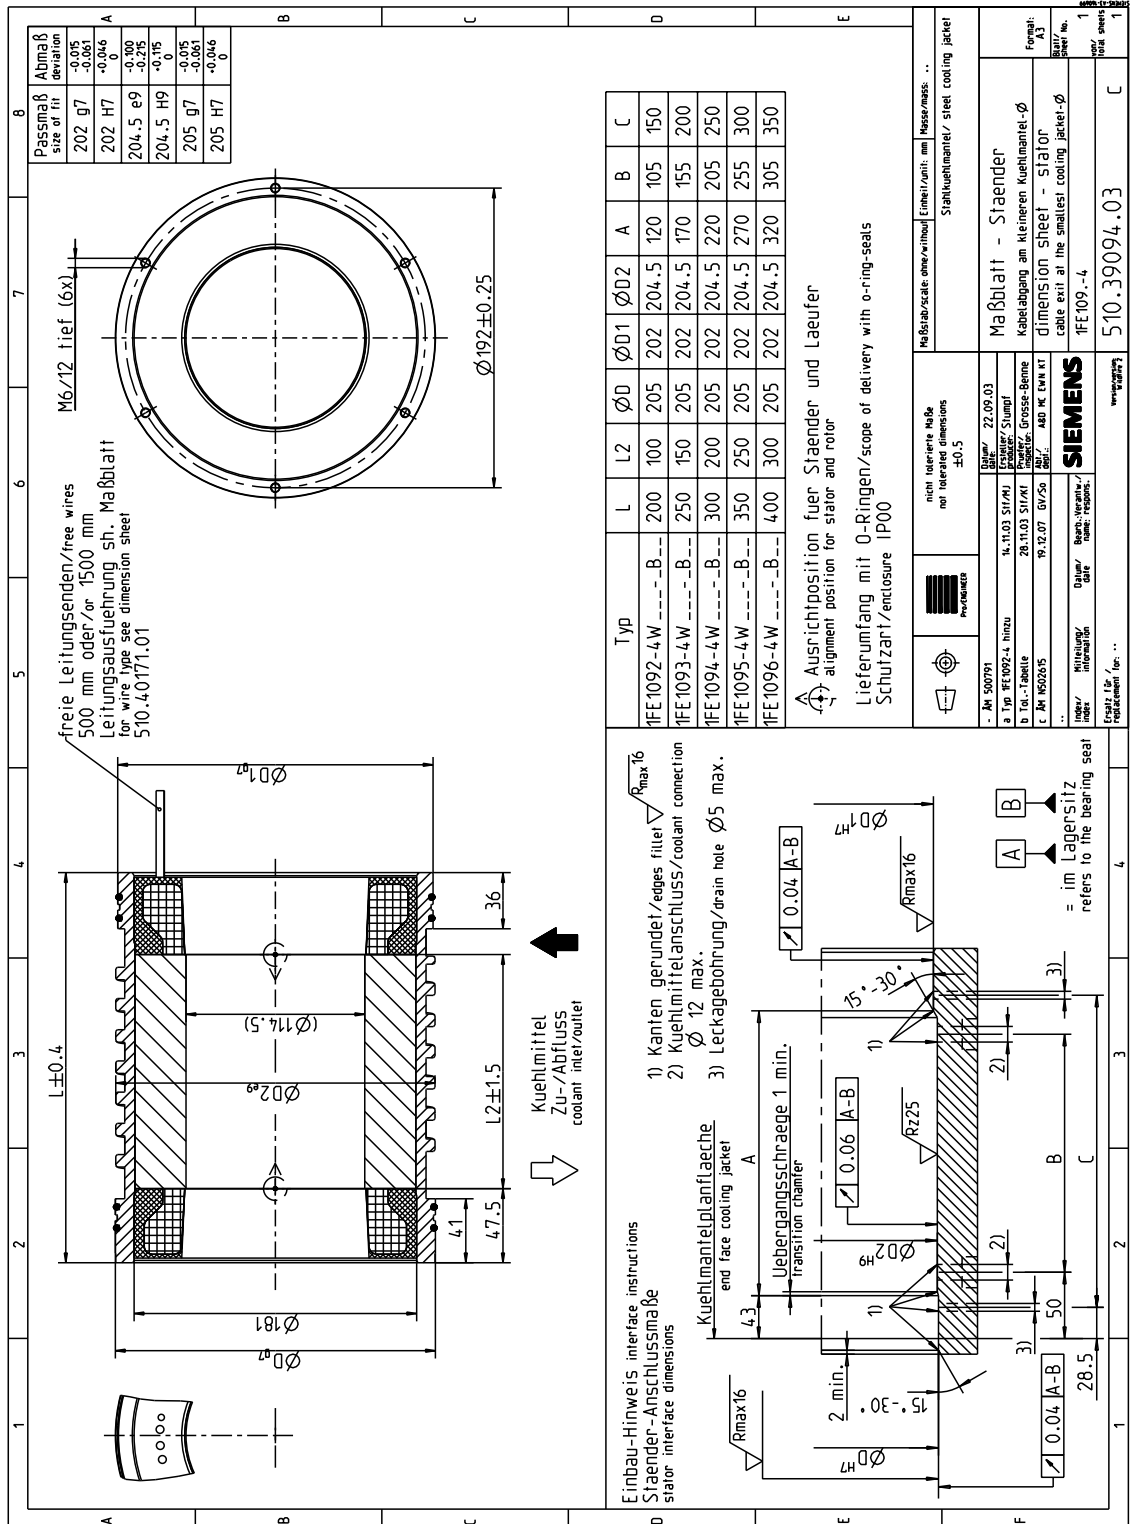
1FE109□-4, stator with cooling jacket, cable outlet at the smaller cooling jacket diameter
